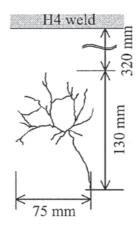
An example of radial shaped SCC crack on a core shroud middle shell remote from any weld.
